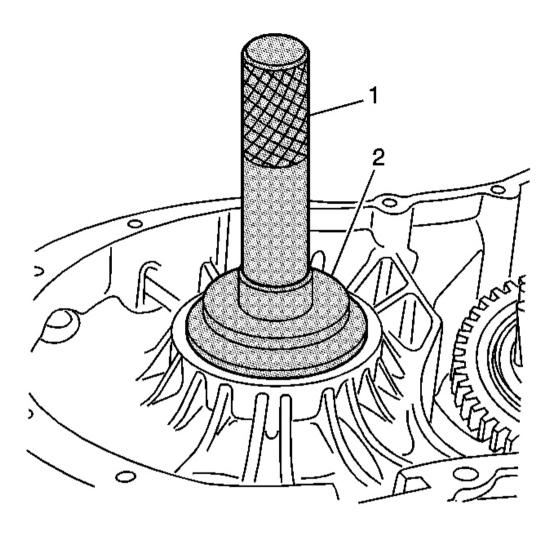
Installing Differential Race Courtesy of GENERAL MOTORS CORP.
